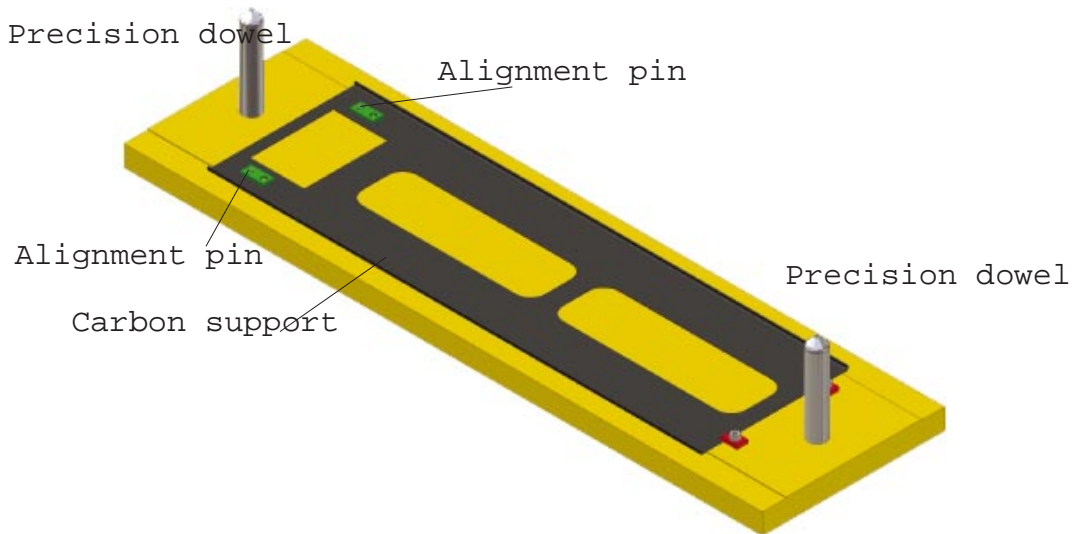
The Carbon support on its jig. This ensemble will be put on the glue dispenser robot
